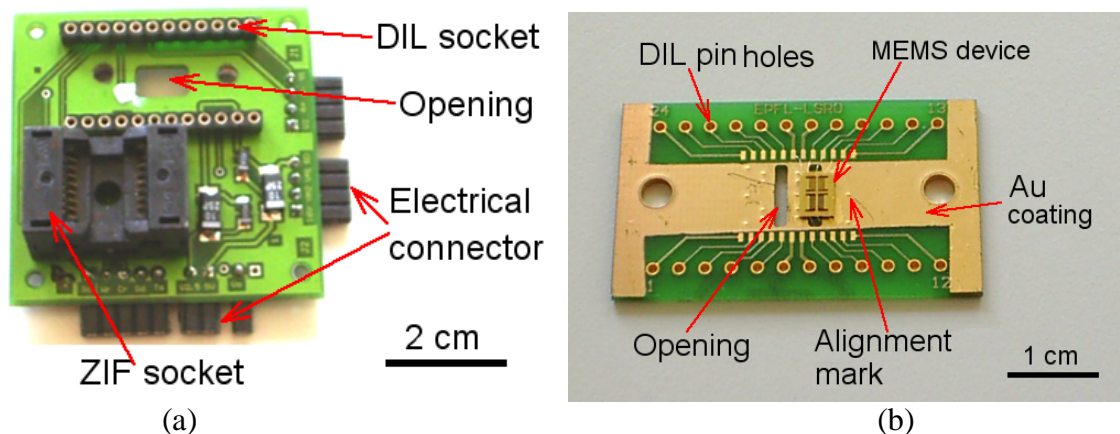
Packages for MEMS device. (a) The big PCB. (b) The small PCB.
